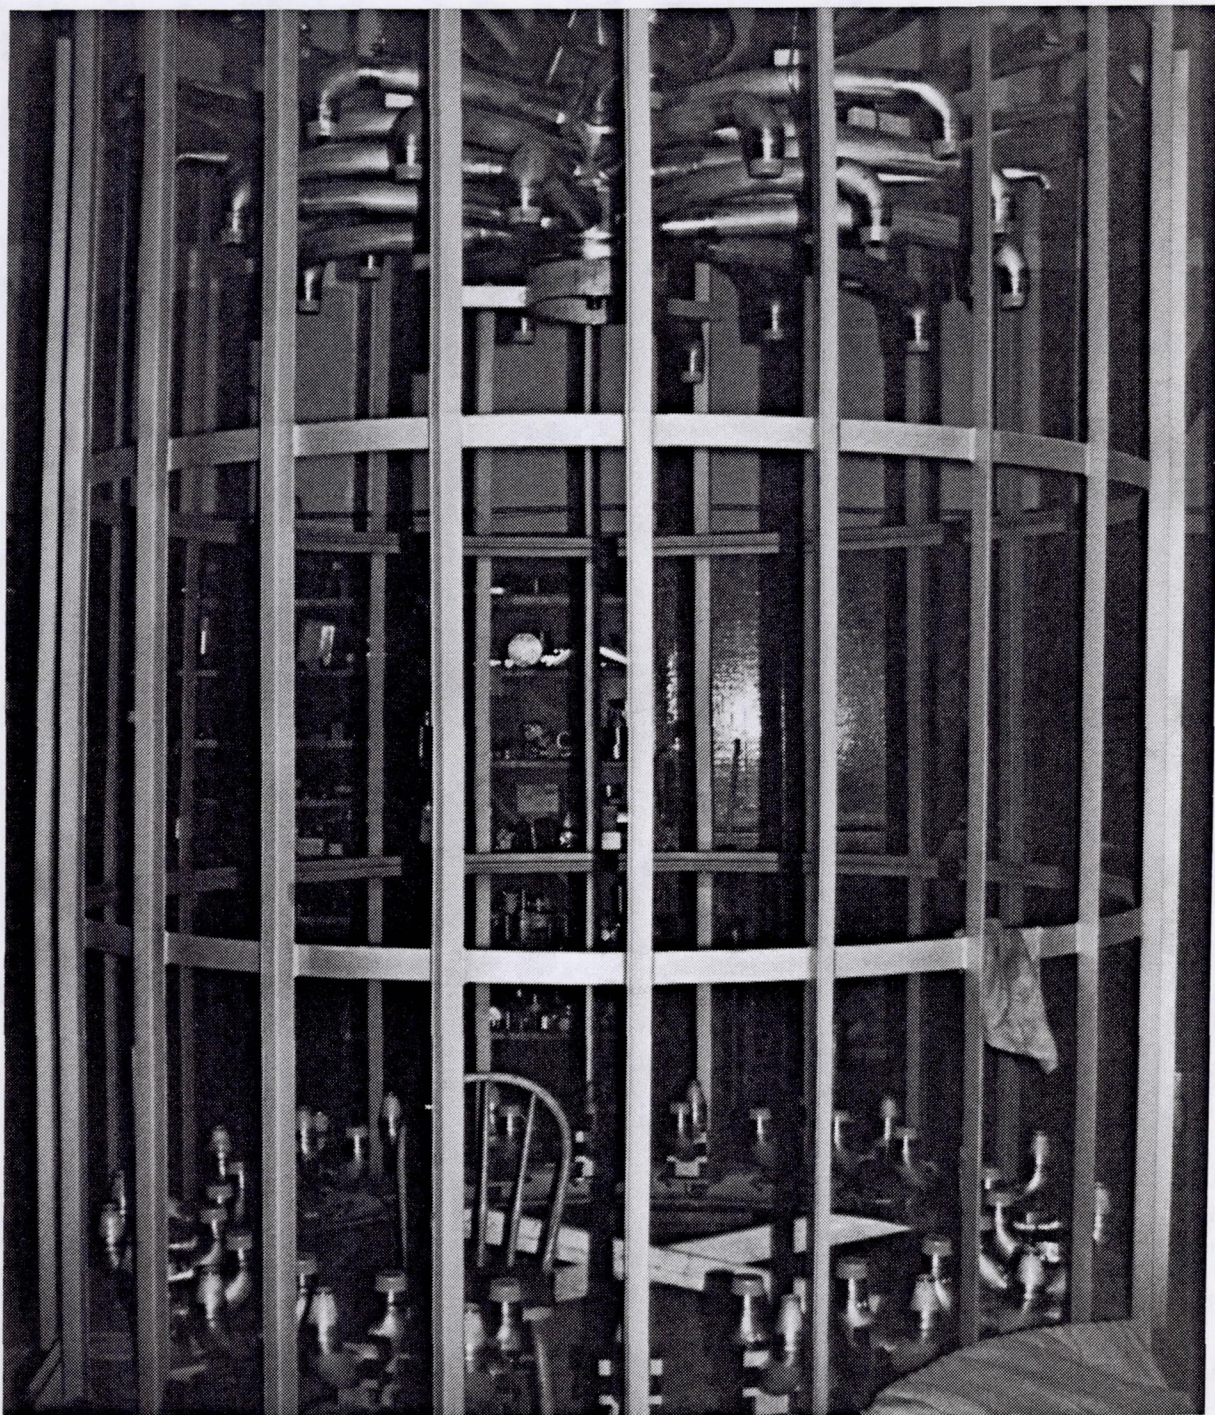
Plenum Positioning Inside Structural Cage for Final Assembly of Heat storage Tubes Inside Receiver Cavity
